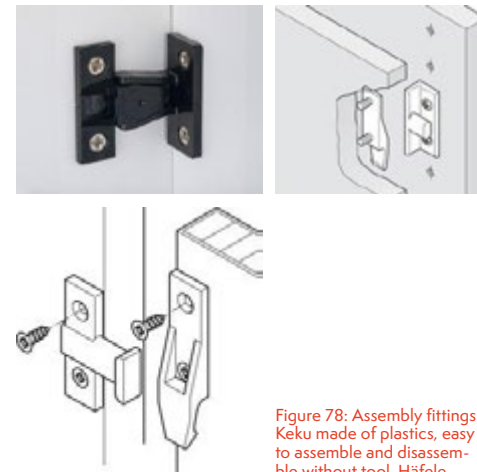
Assembly fittings Keku made of plastics, easy to assemble and disassemble without tool. Häfele
